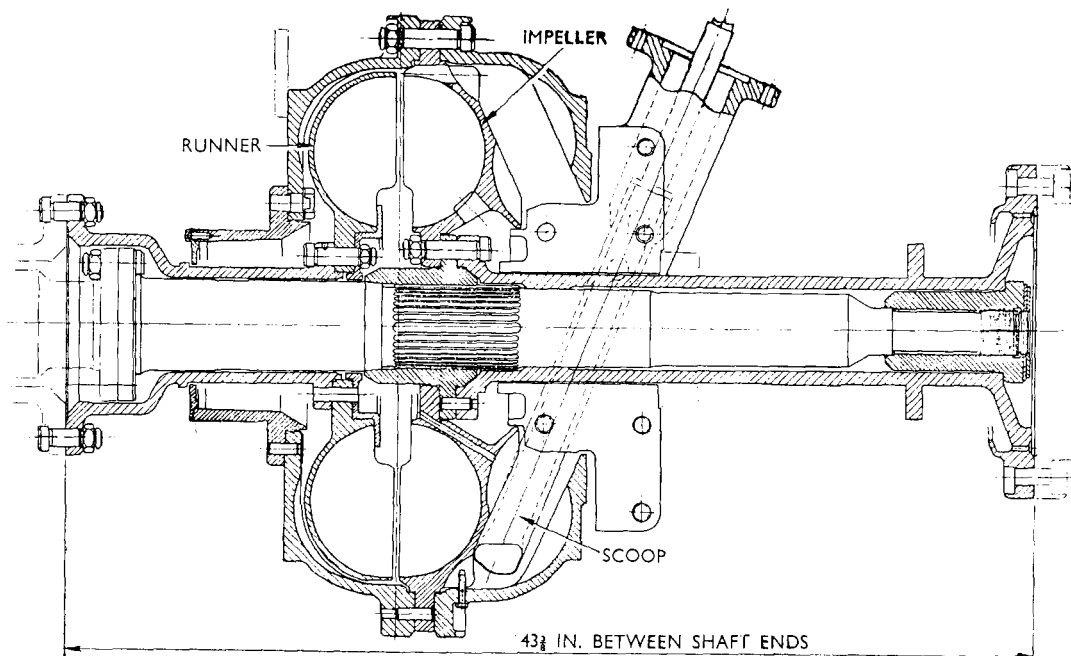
AHEAD HYDRAULIC COUPLING—SECTIONAL ARRANGEMENT
